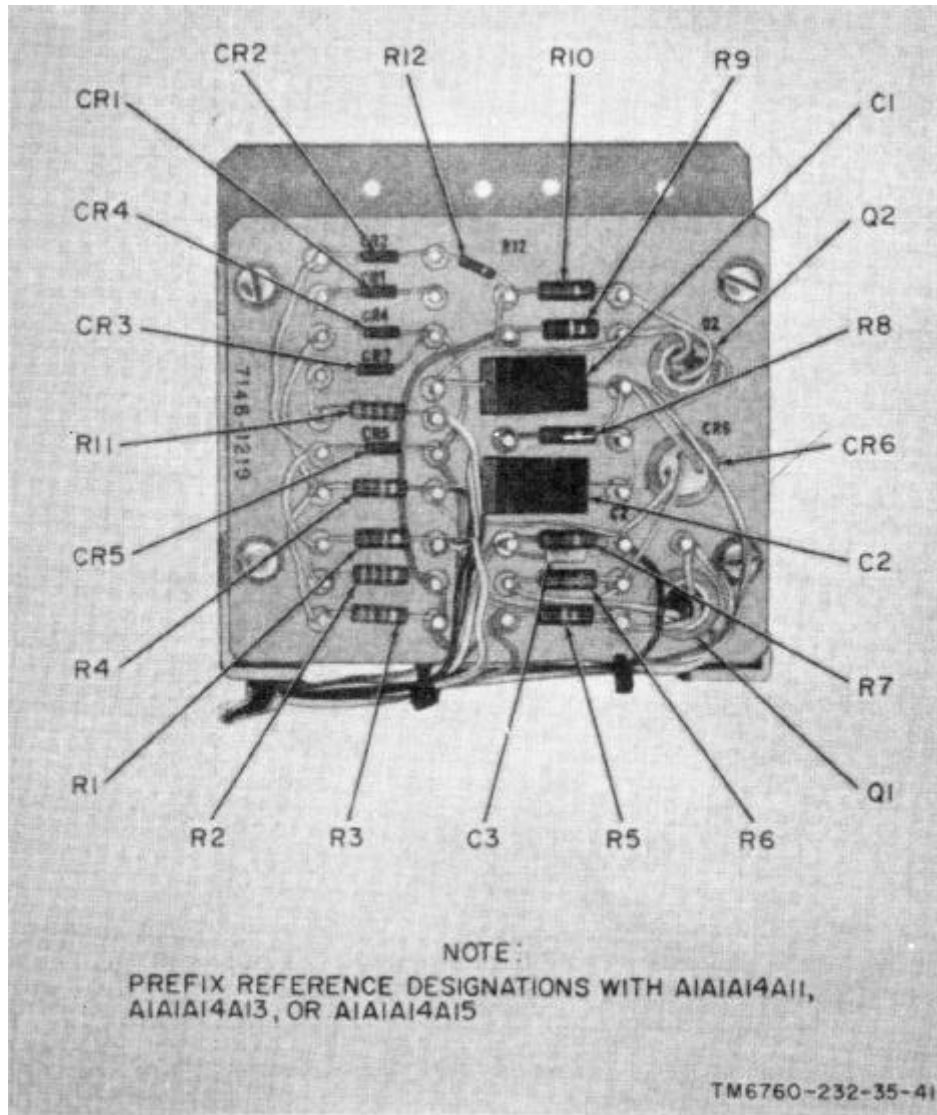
Electronic component assembly A1A1A14A11, A1A1A14A13, or A1A1A14A15, location of parts.
